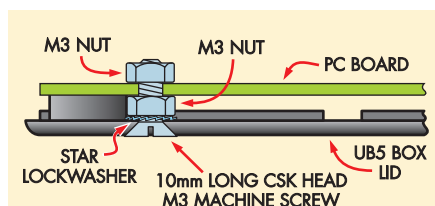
the PC board is mounted on the lid using M3 × 10mm machine screws, nuts and lockwashers.
